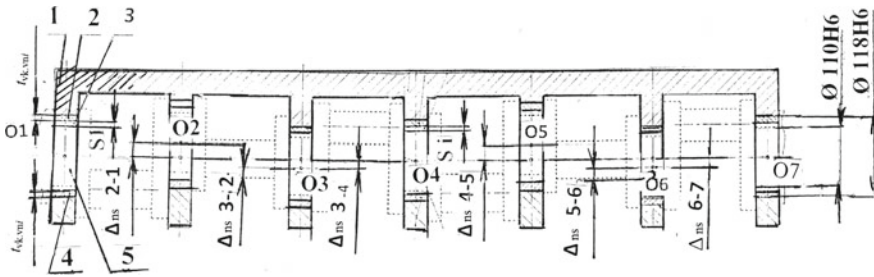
Scheme of 7-support node shaft support with the number of supports multiple number of module supports: 1—crankcase, 2—upper liner sliding bearing crankcase, 3, 4 is lower liner of the sliding bearing, 5—crankshaft; $t_{vk,vb}$, $t_{vk,n,i}$ is thickness of the upper and lower liners; S_1 is the radial clearance of the liner of the first support; deviations from the coaxiality of each subsequent support relative to the previous one from right to left $\Delta_{n,s,2-1} = \Delta_{n,s,3-2} = \Delta_{n,s,4-3}$
